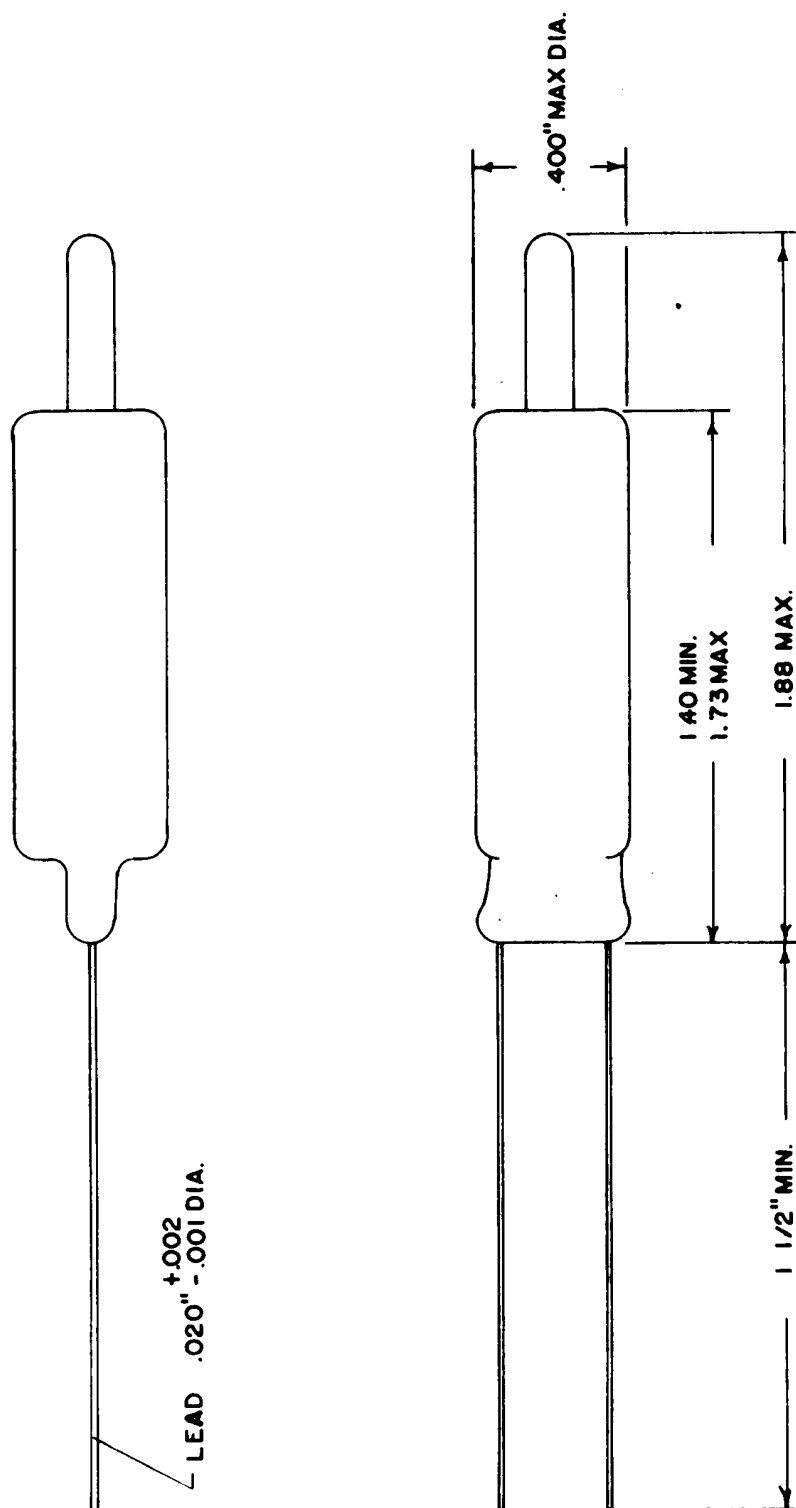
OUTLINE DRAWING OF VOLTAGE REGULATOR TUBE
